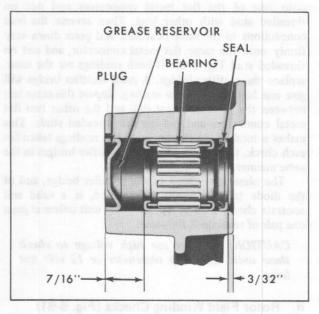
Slip Ring End Bearing Assembly (With Heavy Duty Generator)
